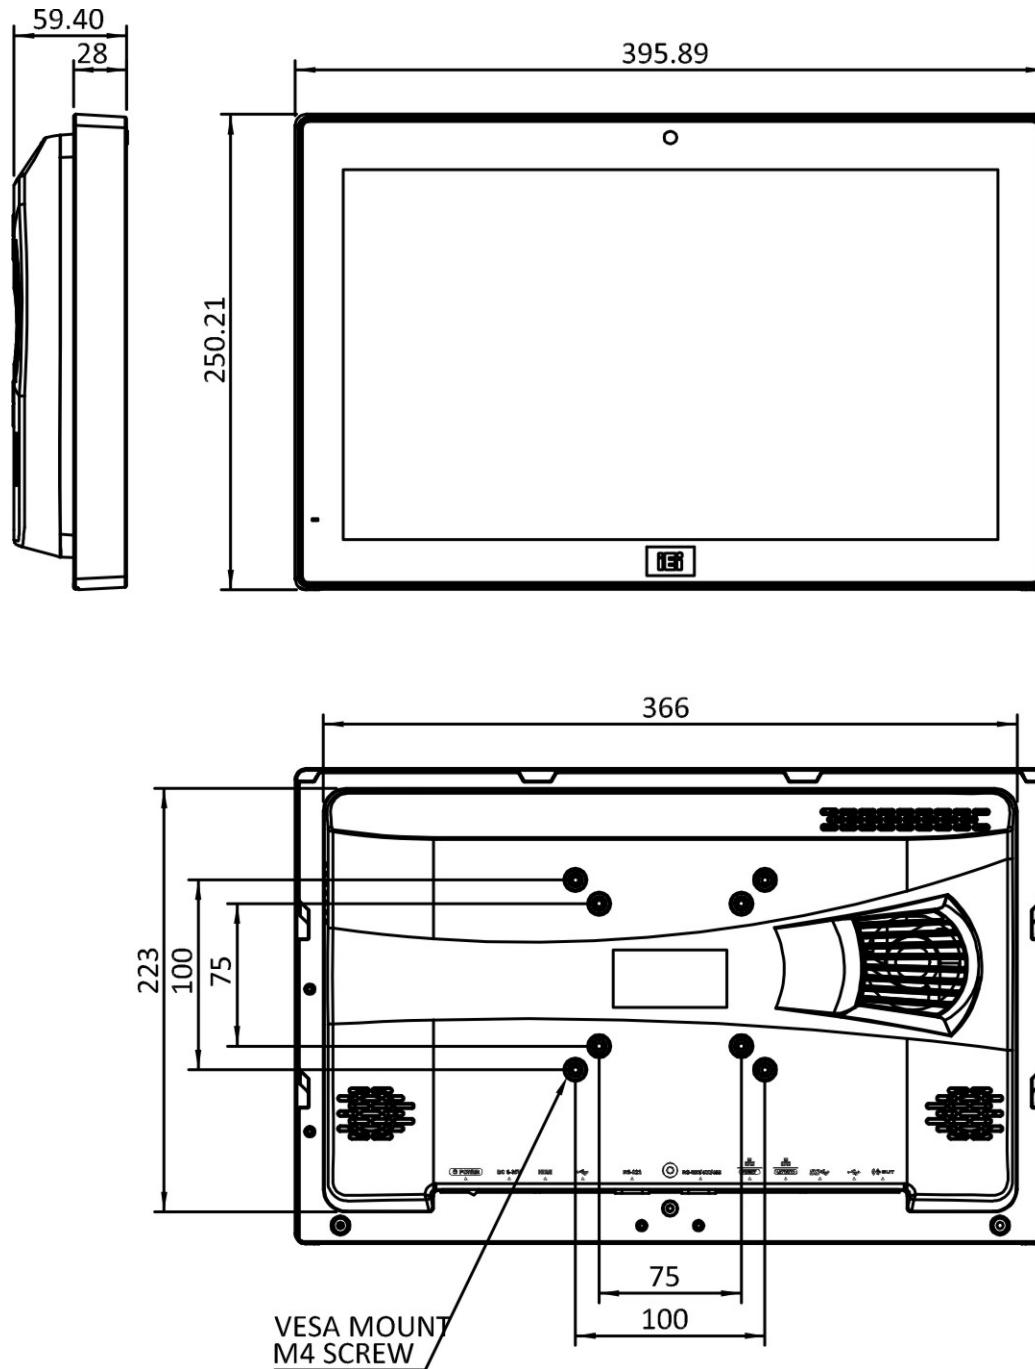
AFL3-W15B-H81 Dimensions (mm)
